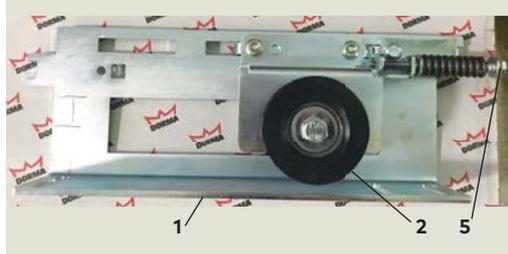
Return pulley tension adjustment, long bolt.
